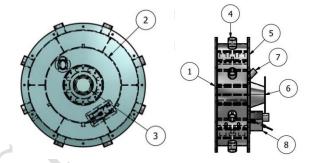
Rotating fluidized bed reactor: (1) Acrylic Front Plate (2) Chamber (3) Chimney (4) Jacket (5) Acrylic Back Plate (6) Air Outlet (7) Feed inlet (8) Particle Outlet
